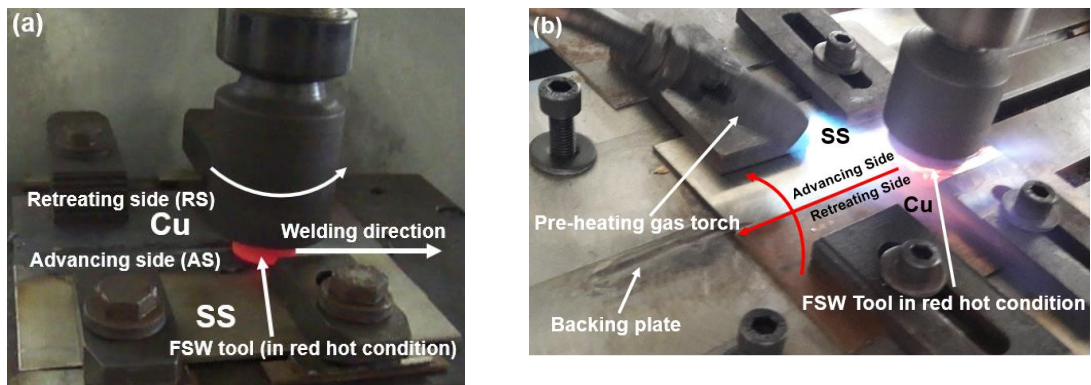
Manufacturing of FSW (Cu-SS) joints: (a) without pre-heating; (b) with pre-heating
